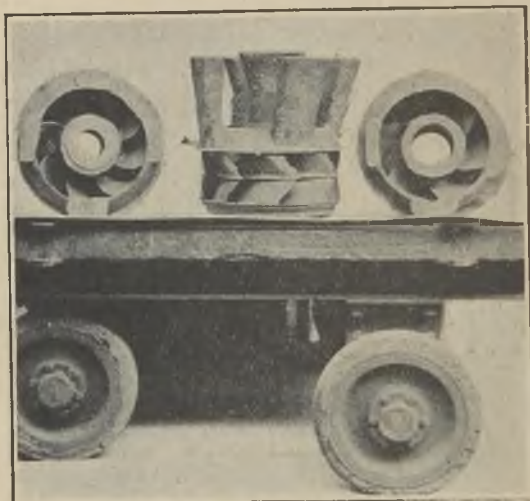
A HEAVIER TYPE OF IMPELLER CASTING.
